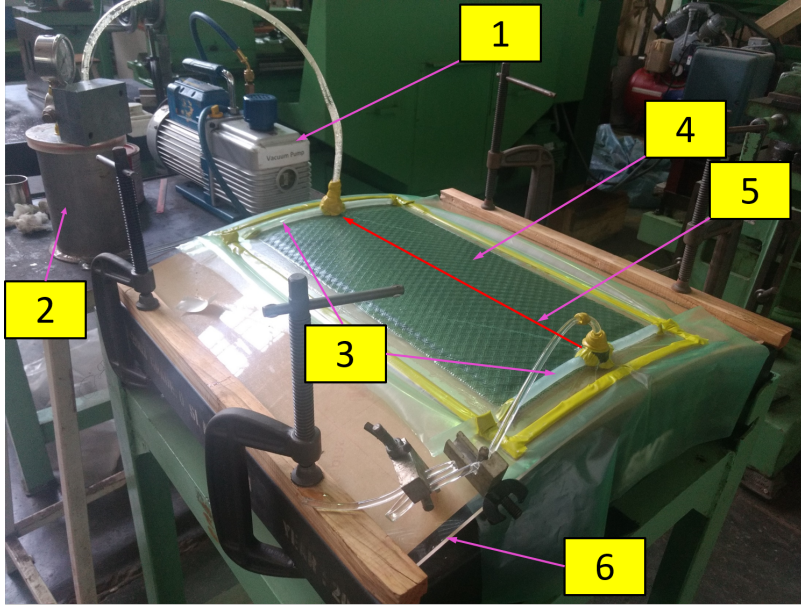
Fabrication setup for curved panel (1) vacuum pump (2) catch pot (3) spiral tube (4) poly bag (5) flow direction of resign (6) acrylic sheet
